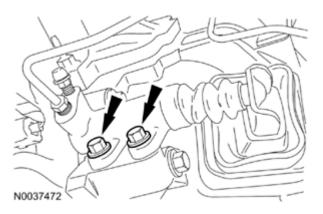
Locating Clutch Slave Cylinder Bolts Courtesy of FORD MOTOR CO.
